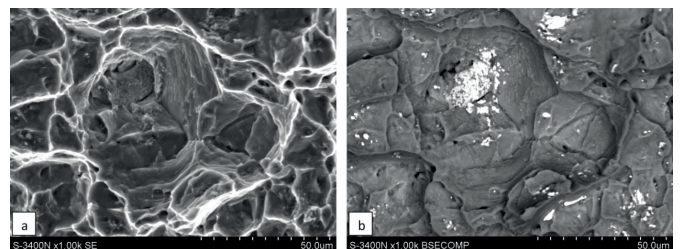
Fracture surface of the WE43-T6 alloy joint after the tensile test at the temperature of 300°C: a) cracks inside the Mg(α) solid solution grains, SE, b) intermetallic phase on the surface of the fracture, BSE
